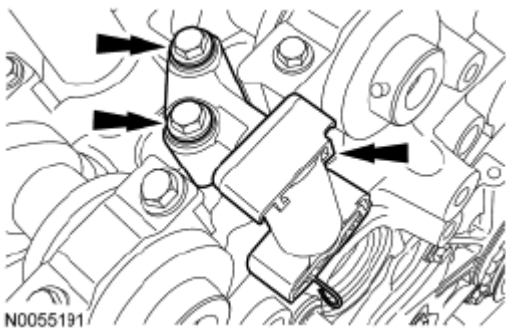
Locating RH Secondary Timing Chain Tensioner & Bolts
